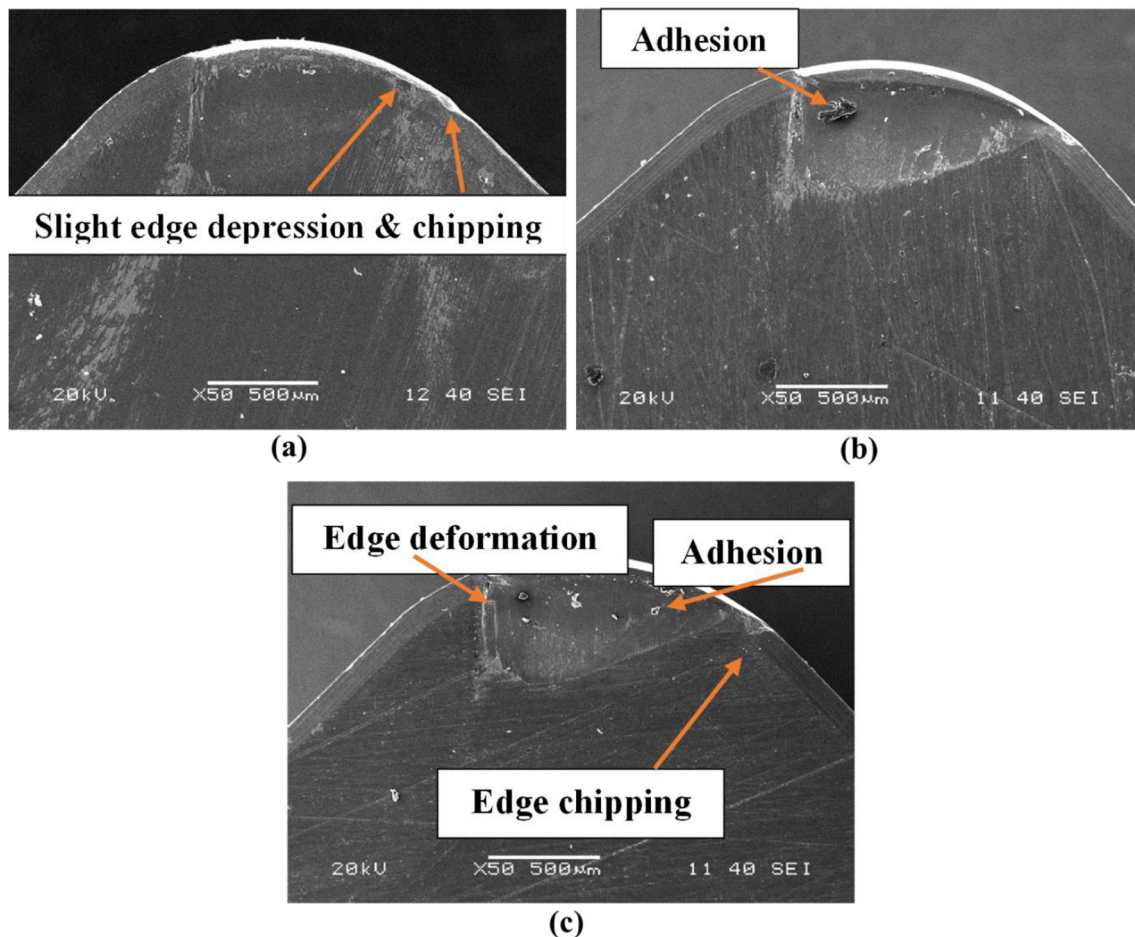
Crater wear at cutting speed of 51 m/min and axial feed rates of: (a) 0.16 mm/rev, (b) 0.20 mm/rev, and (c) 0.24 mm/rev under compressed air condition
